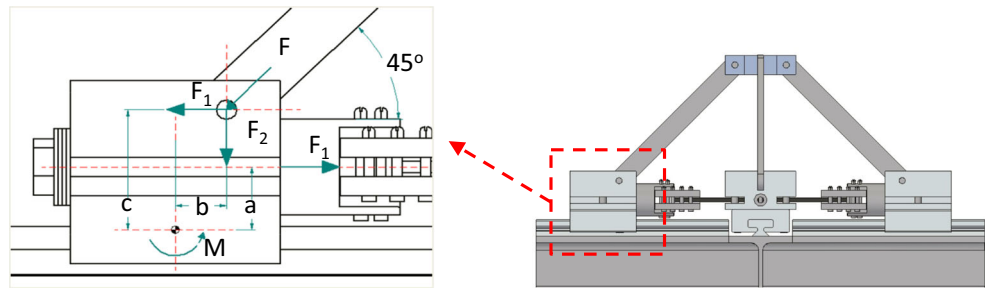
Dimensions and detail of the position of holes on the device over the linear guide, to minimize the bending moment on the carriage axis
